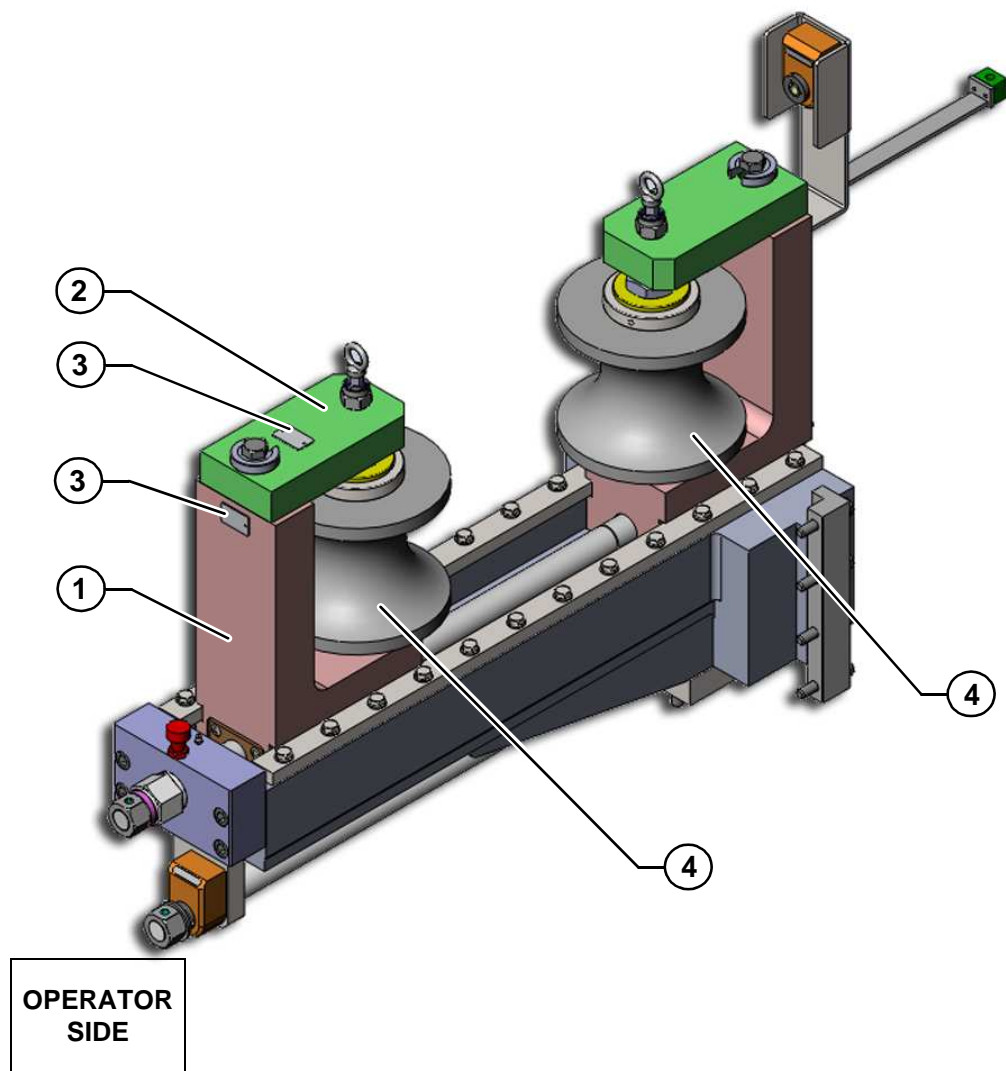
J Assembly scheme of roll locking ring nuts according to line work direction
